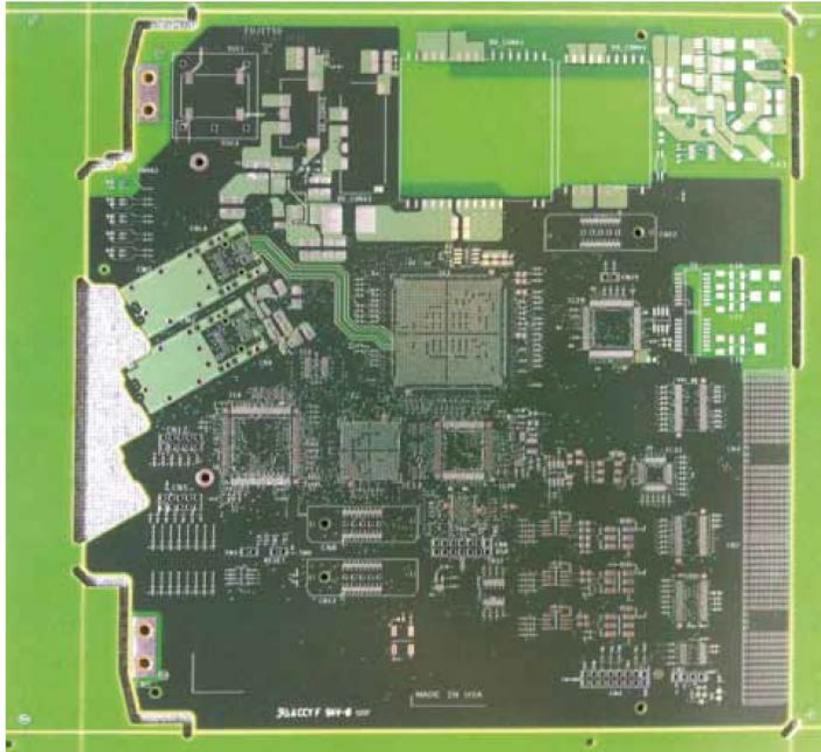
First PCB fabricated using IPC-2581 – a 12 layer board – a board that is an active product being built by Fujitsu Network Communications, reducing the overall upfront fabrication time by 30%
